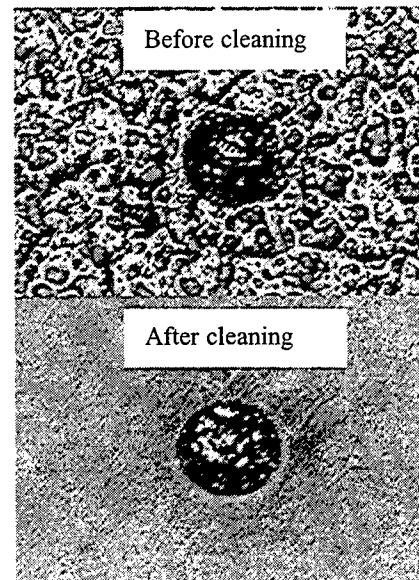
The typical optical micrograph of PCB surfaces before and after laser cleaning.
